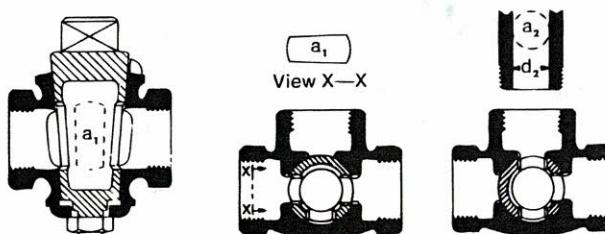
Straight through plug valve (left), 3-way plug valve positioned for straight through flow (center), and positioned for 90° flow (right). (courtesy of Crane Valve Co.)
